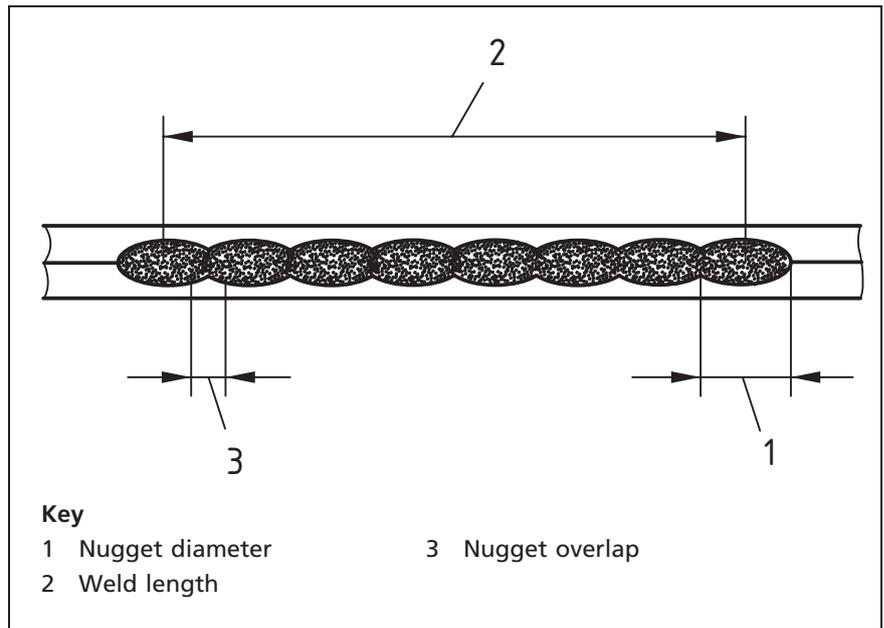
Typical example of weld made using pressure – Seam weld
